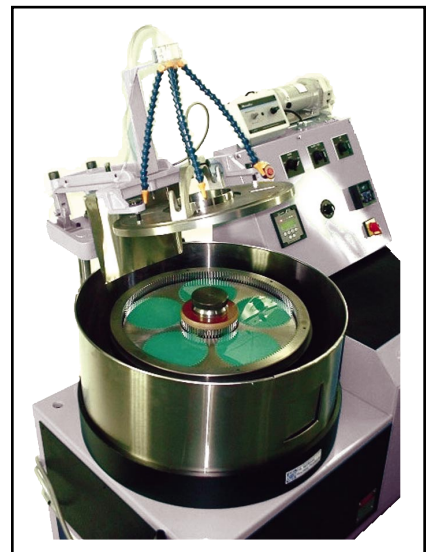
PR-1 double-sided lapping machine. Courtesy of PR Hoffman.
